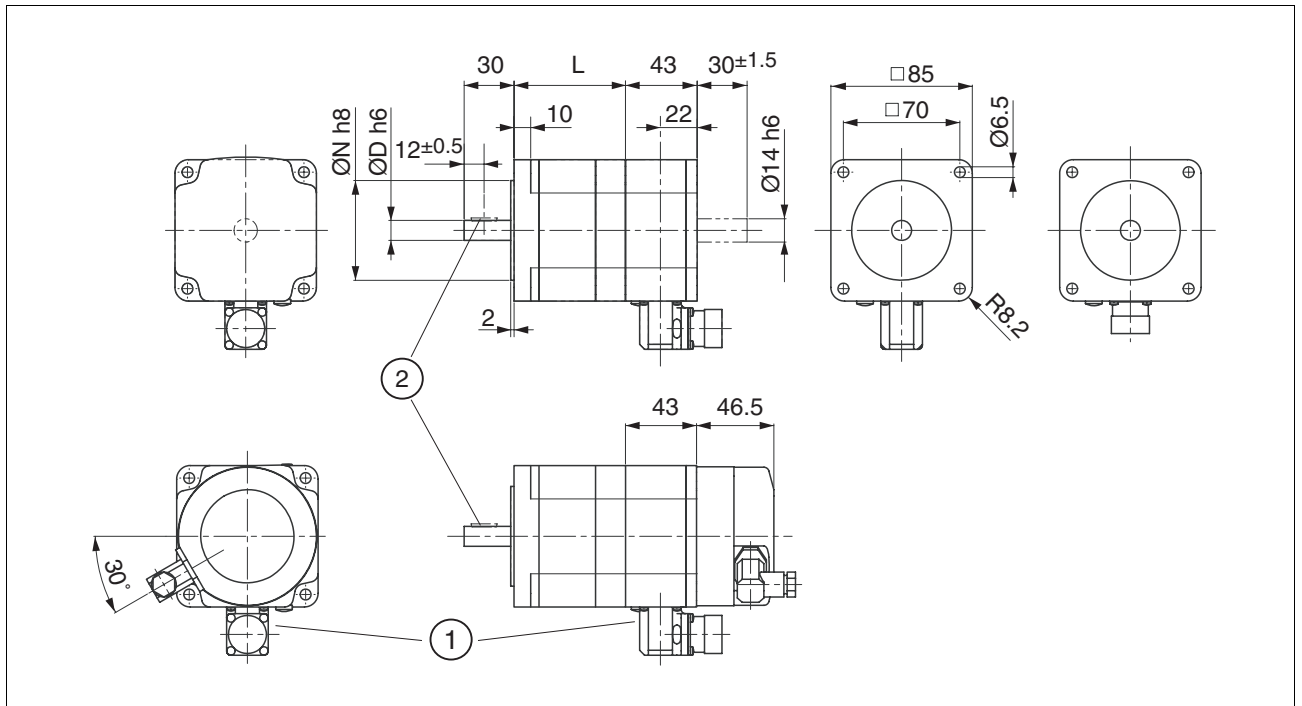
BRS39 dimensional drawing connector version without encoder
